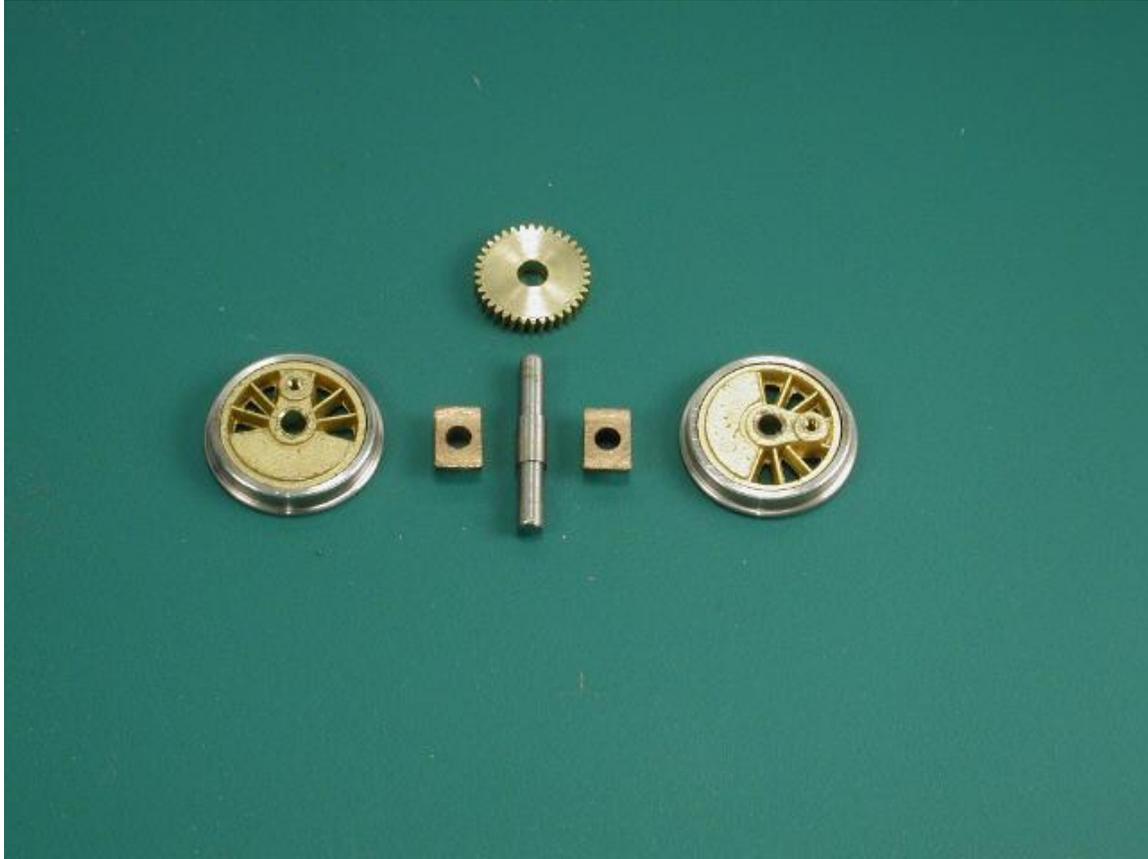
Using the NWSL Puller, both wheels and both bearings have been removed from the original geared axle. The new axle and gear are pictured, along with the drivers and bearings.
